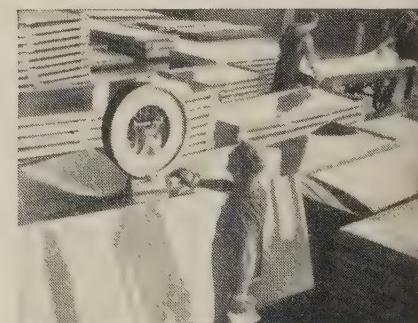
types including special low carbon steel plates for forming and welding, leaded New E-Z-Cut, etc.
